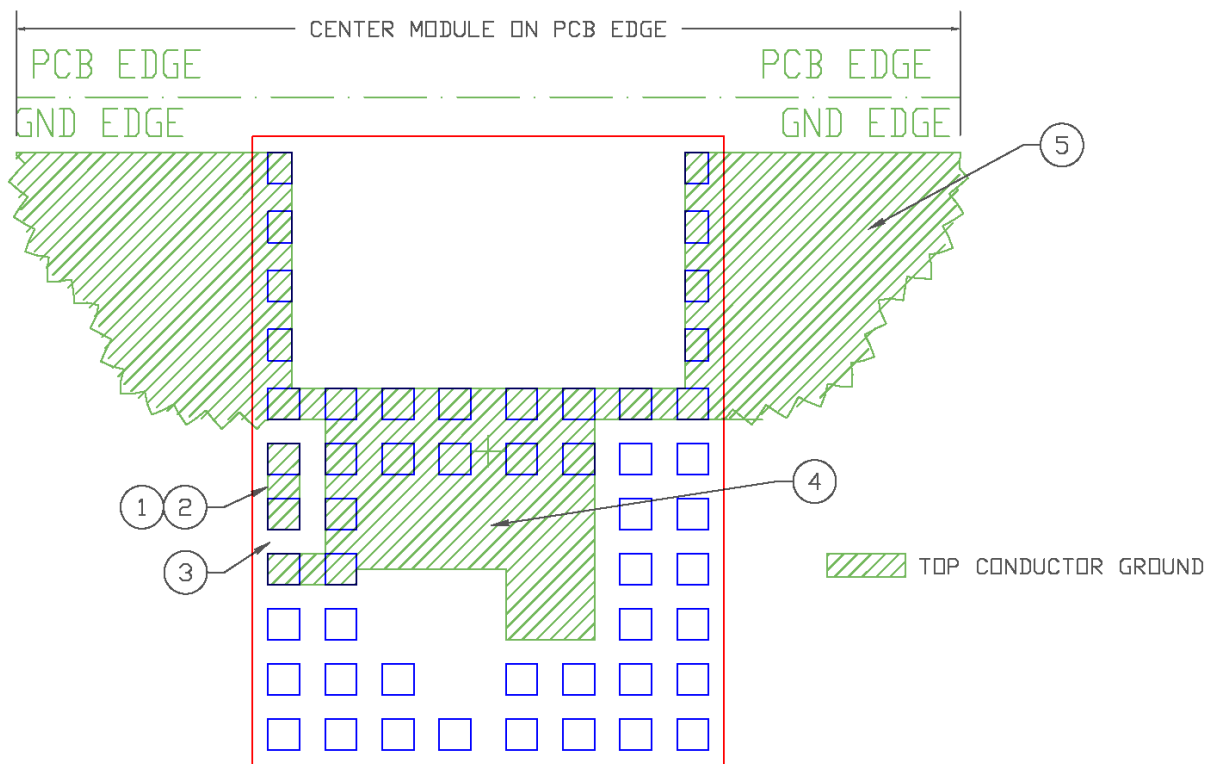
and 2 show proposed layout patterns for the RSL10 SIP. The specific layout pattern used in the application may have to be adjusted to meet certain needs of the PCB manufacturer or assembly house. PCB design files for the RSL10 SIP are available at www.onsemi.com.
